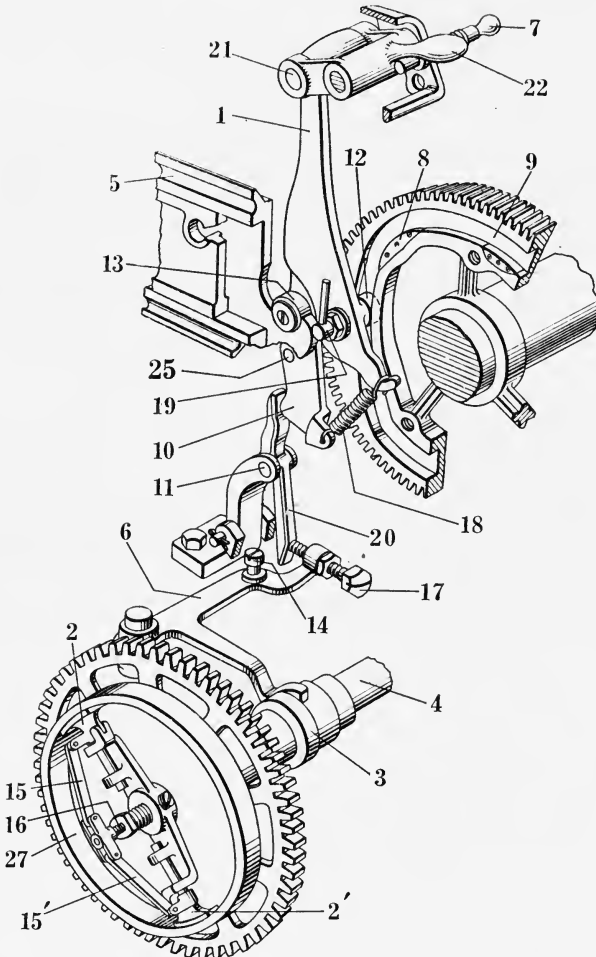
The Mold Cam Safety Lever. Detail Drawing and Perspective View. This device functions when any abnormal obstruction prevents the full forward stroke of the mold slide, and disengages the friction clutch, stopping the machine. The machine will not go into action again until the obstruction is removed.
